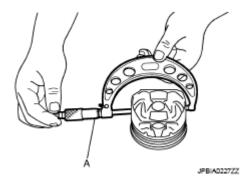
Measuring Outer Diameter Of Piston Skirt Courtesy of NISSAN MOTOR CO., U.S.A.
